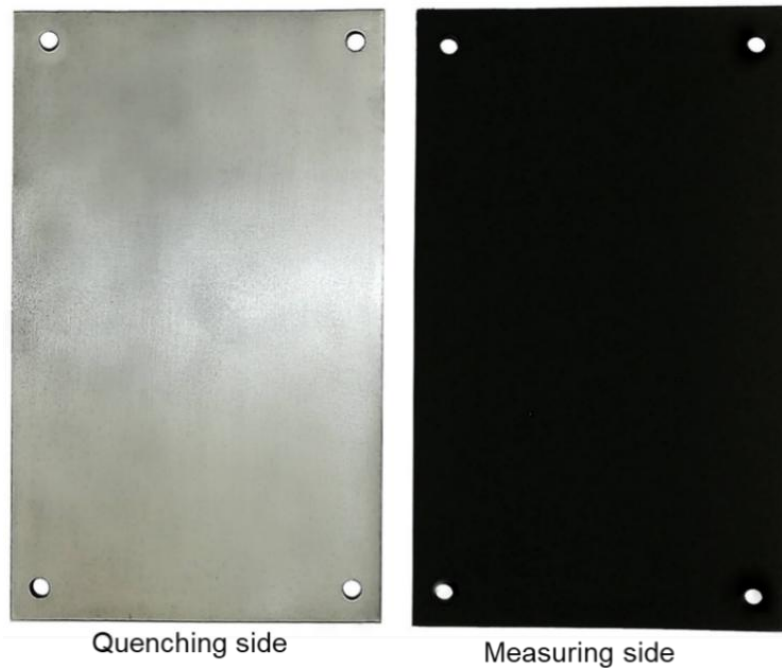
Measuring and quenching side of a 2 mm AA6082 plate specimen
